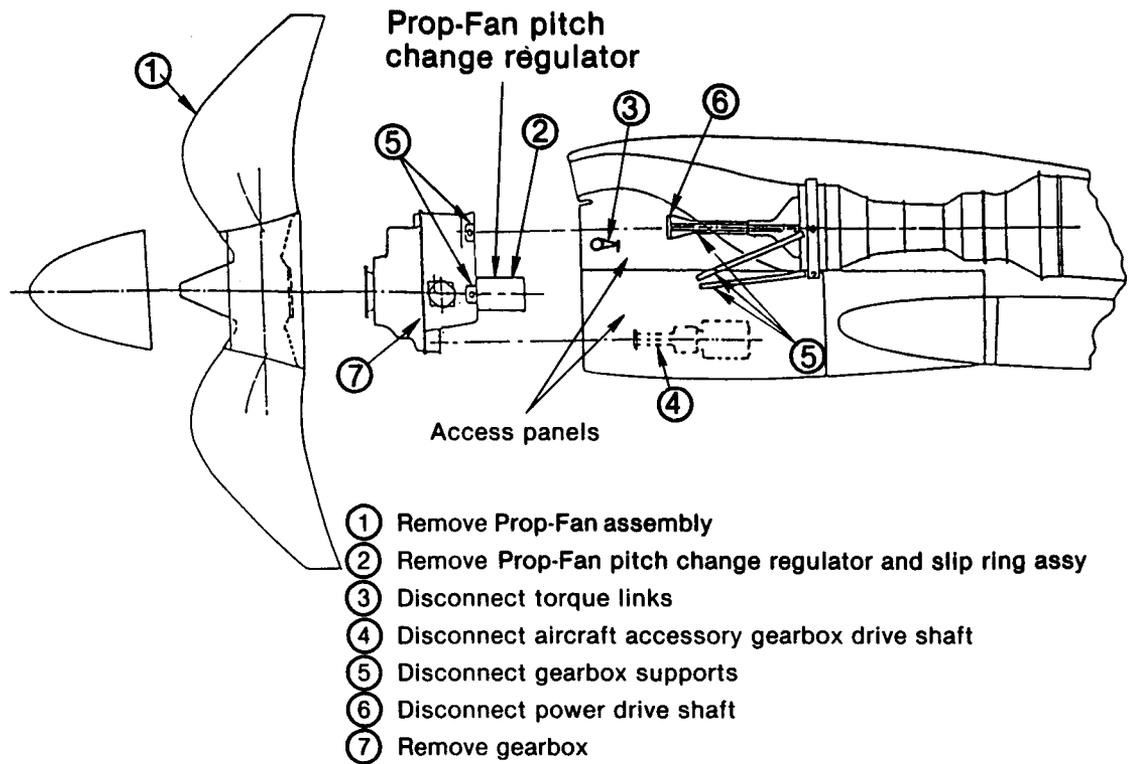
Offset Gearbox Removal - The average time for removal and replacement is 180 minutes. (J27638-26)
